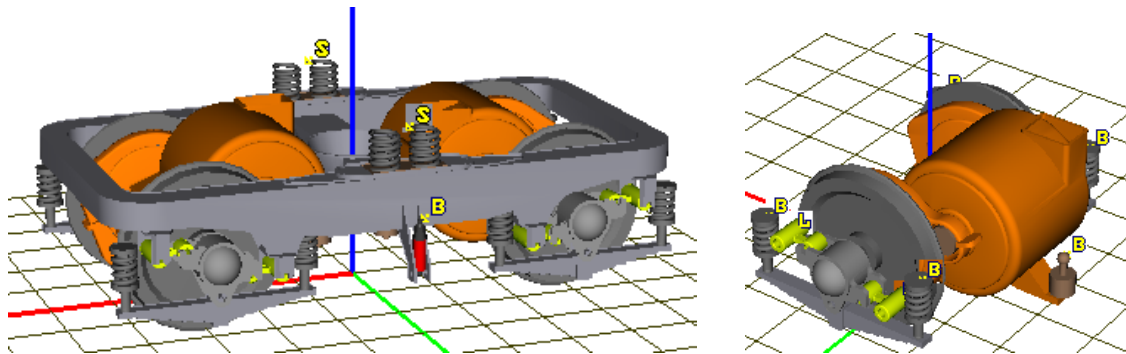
Subsystems “bogie” and “wheel-motor assembly”
